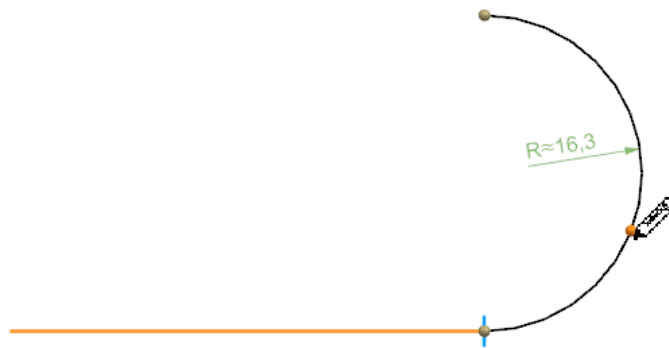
Tangent Direction handle displayed while drawing an arc using the Line tool
